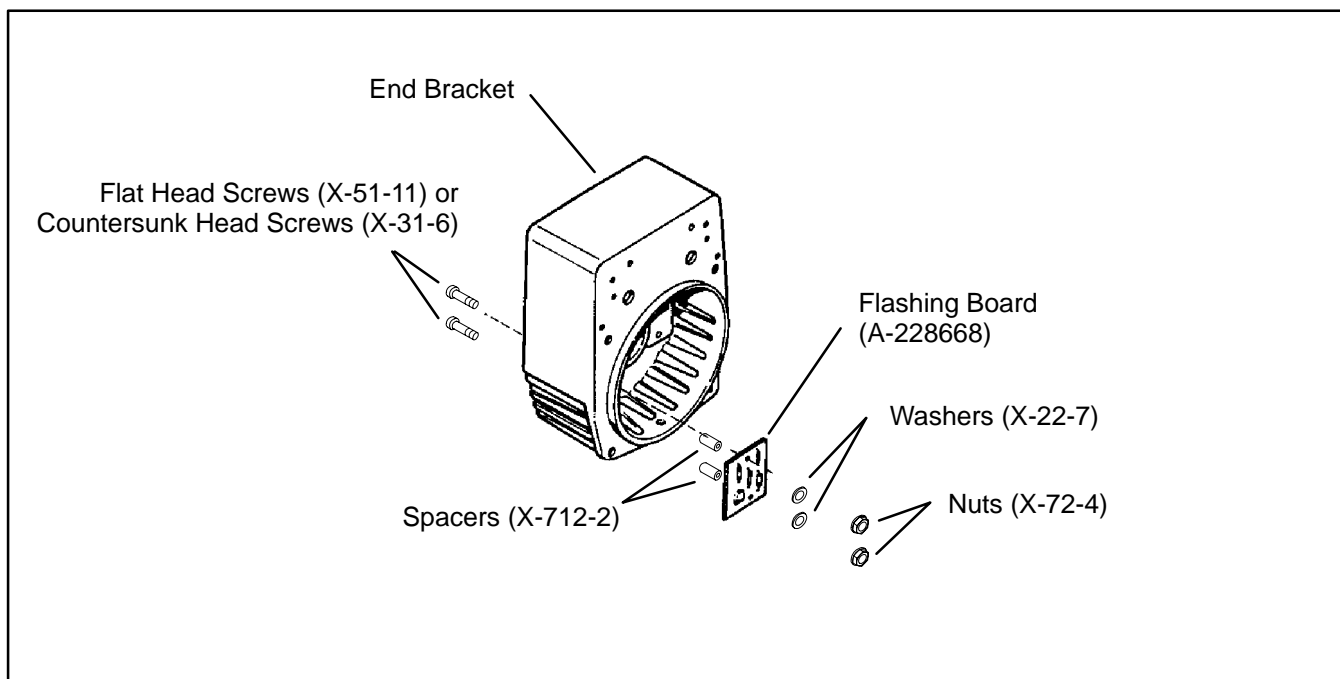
Flashing Board Location When Mounted In The End Bracket.
